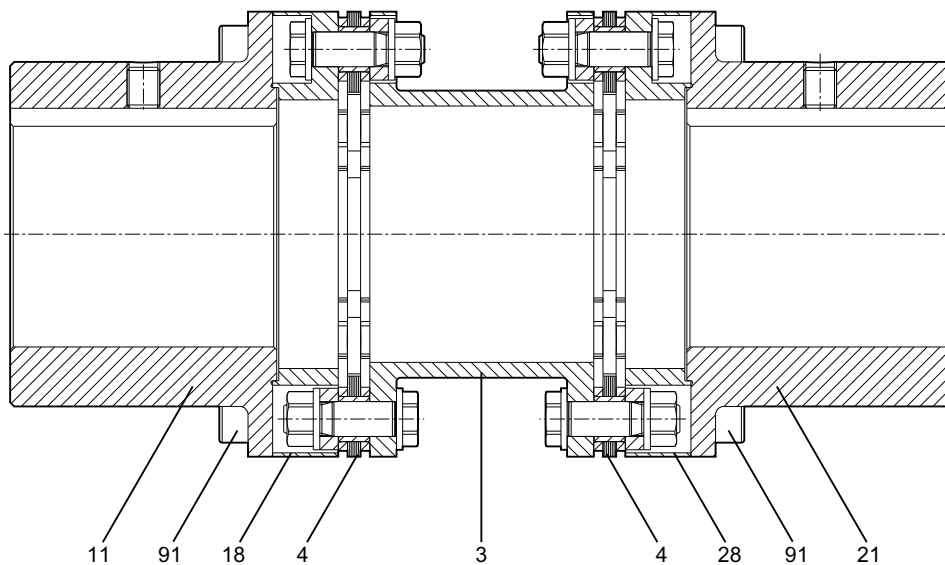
Spare parts drawing for type MCECM / MCHCM
